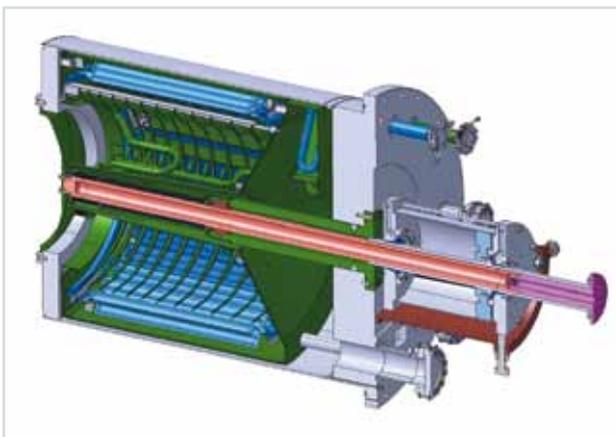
Finalised detailed design of the ITER torus cryopump prototype.
